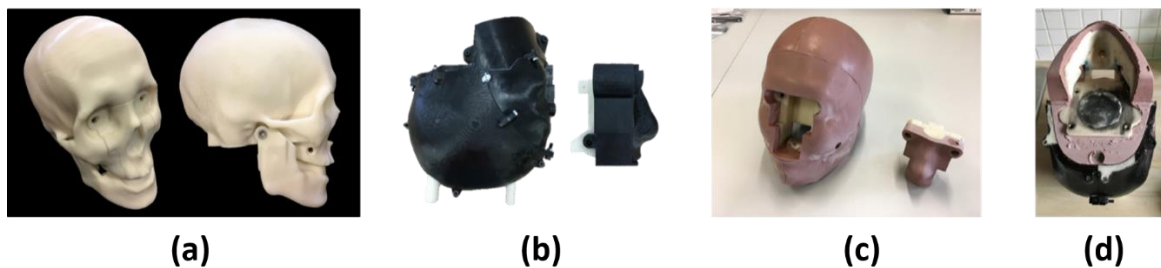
Outline of the LU headform manufacture: (a) FDM of skull components, (b) FDM of mould tooling (shown in situ), (c) completed external soft tissue moulding, (d) Gelatine moulding.
